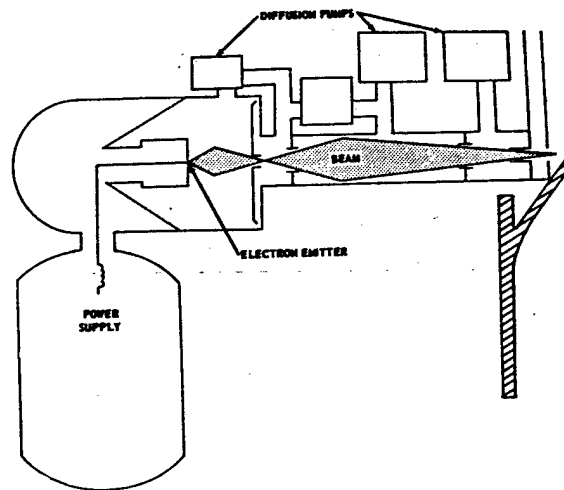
NONVACUUM ELECTRON-BEAM WELDER
